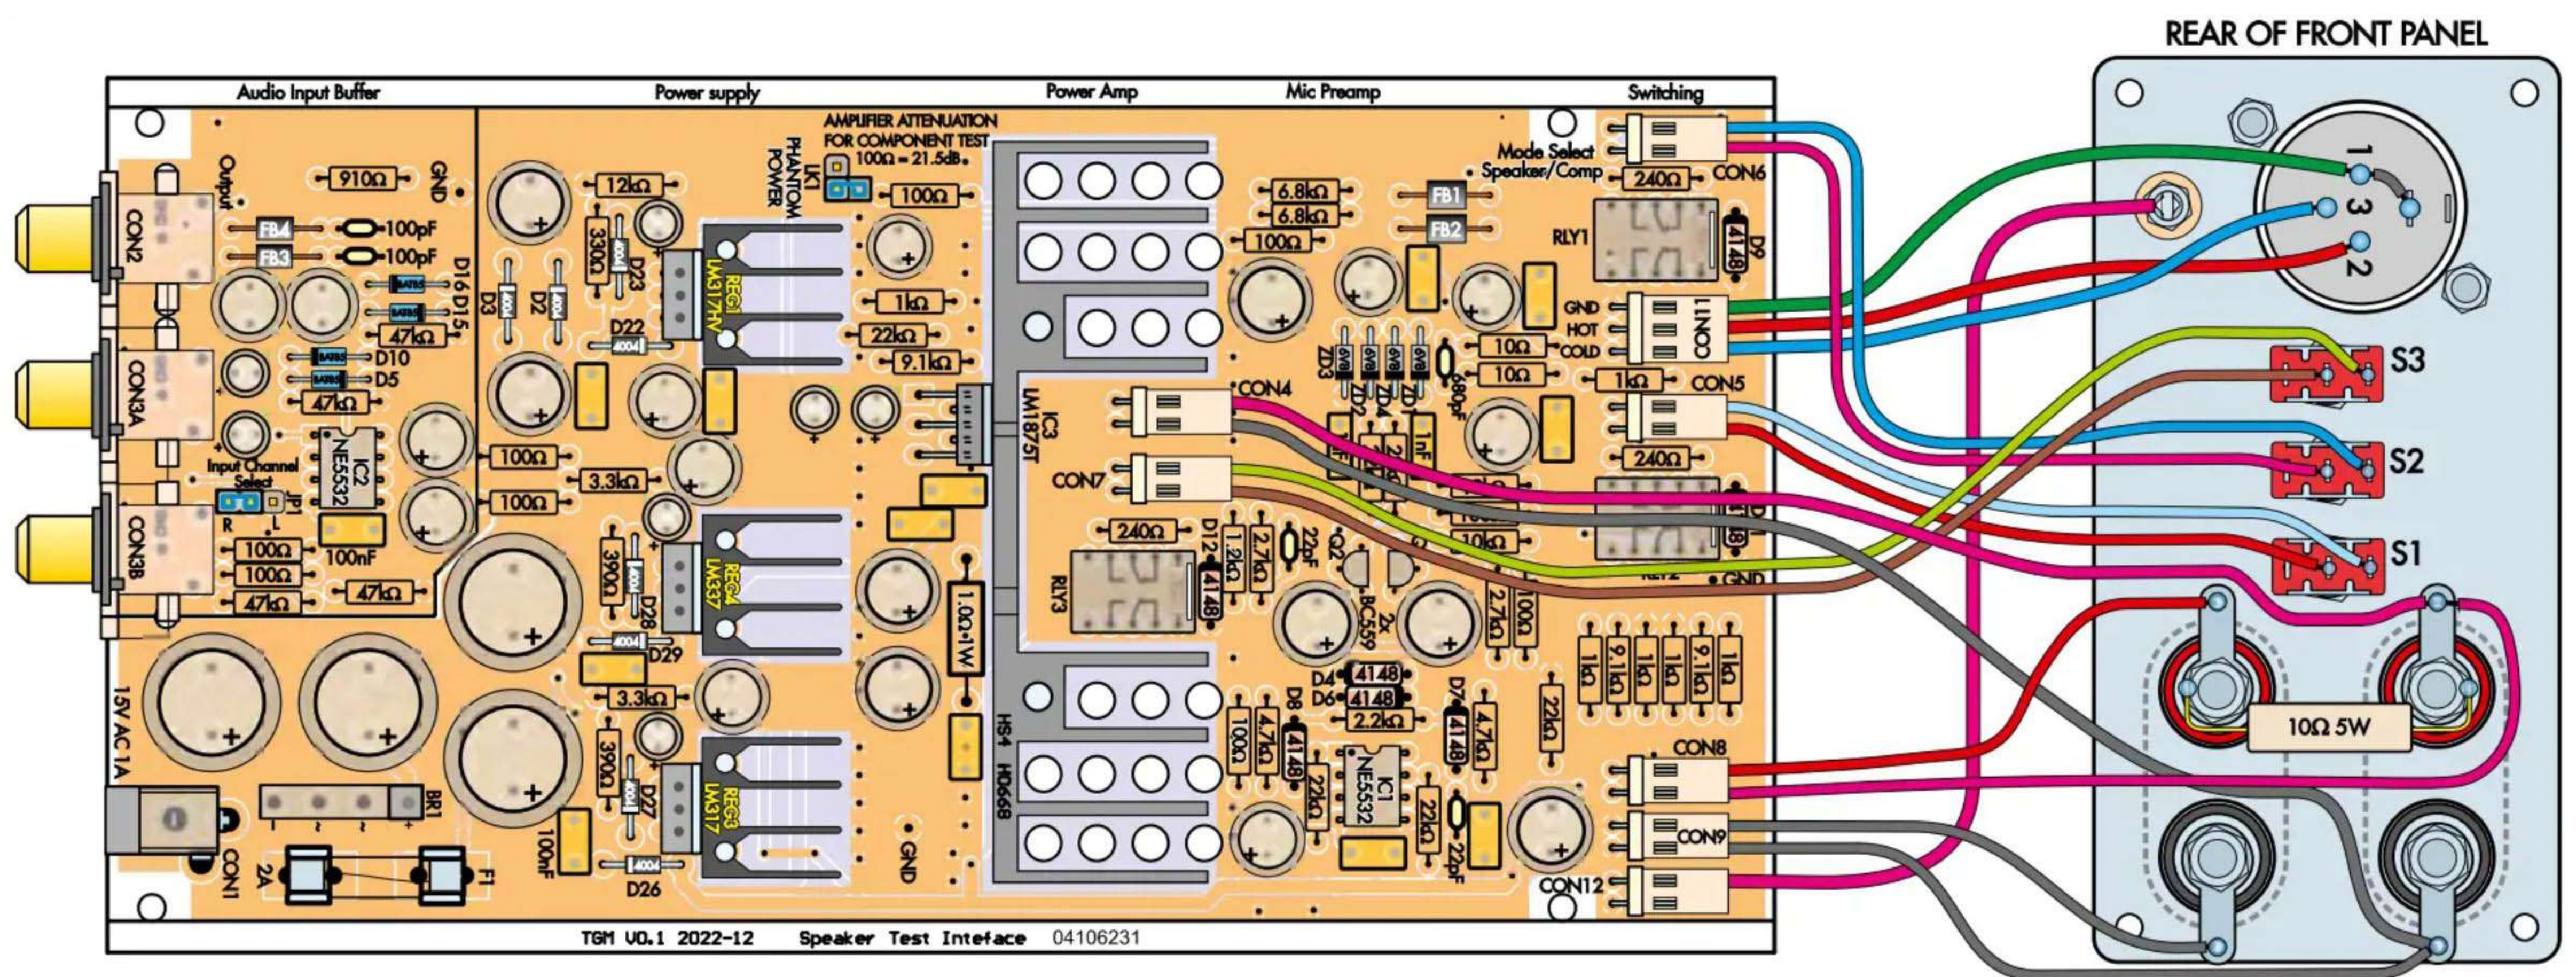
use this diagram and Photos to wire up the front panel. By using polarised header plugs, the whole assembly can be disconnected from the main board, making assembly and disassembly easier.
